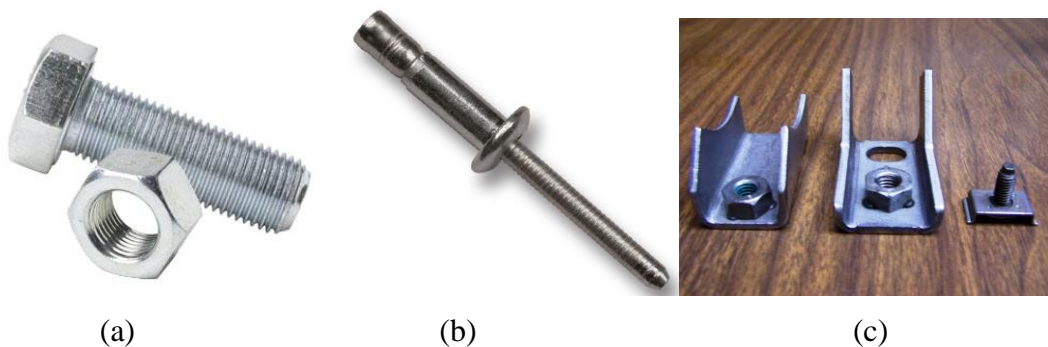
(a) Bolt and Nut; (b) Rivet; and (c) Weld Nut [1]
